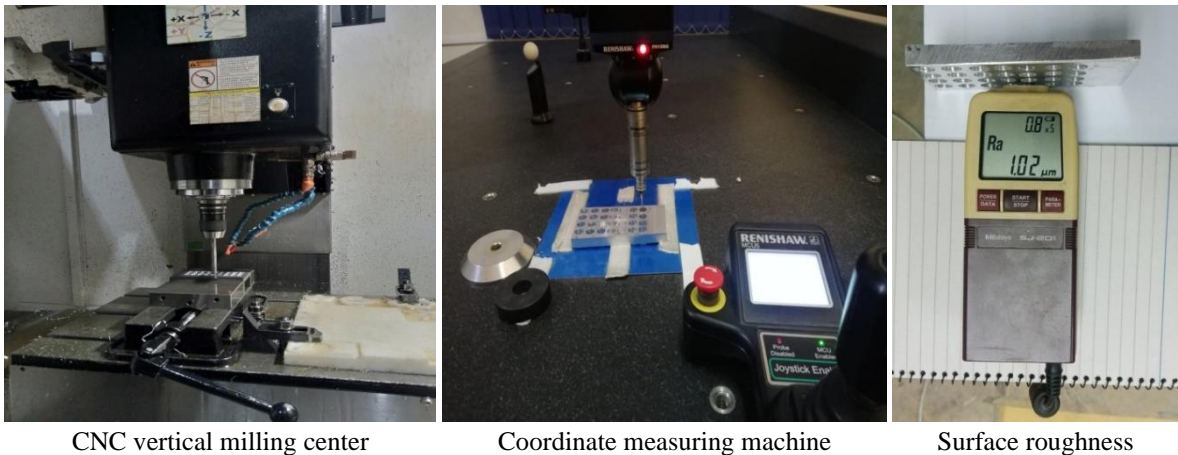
(a) CNC vertical milling center (b) Coordinate measuring machine (c) Surface roughness tester
